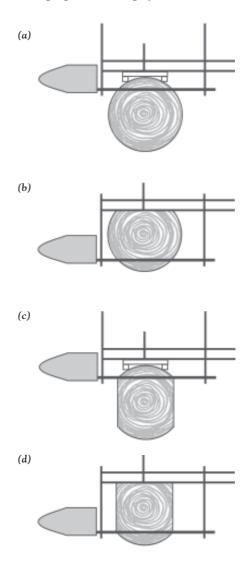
Cutting a square beam with a rail (or carriage) mill.
